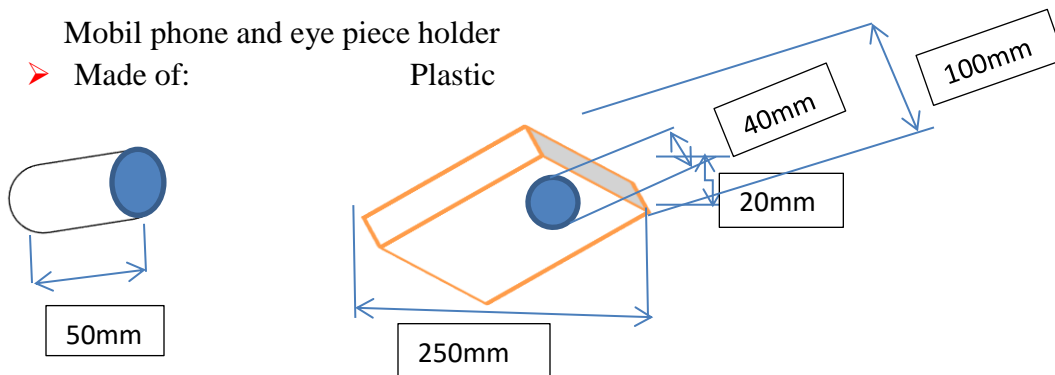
a. Eye piece Holder & Mobile camera Attachment/Holder
